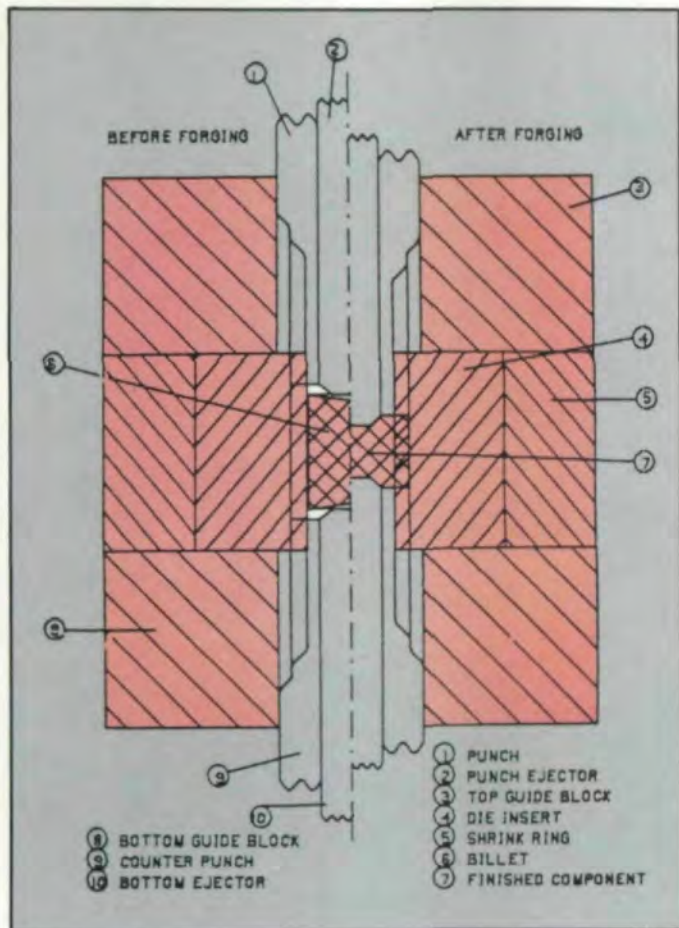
Typical Tool Setup for Forging Spur or Helical Gears
